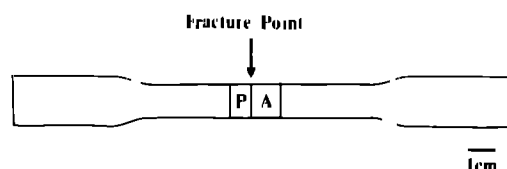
Dimensions of as moulded test bar, indicating samples used for loss on ignition experiments and porosimetry.
